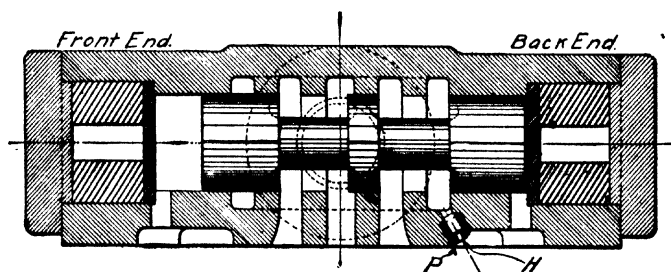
Spool-Valve and Chest. "Sergeant" Rock Drill.
